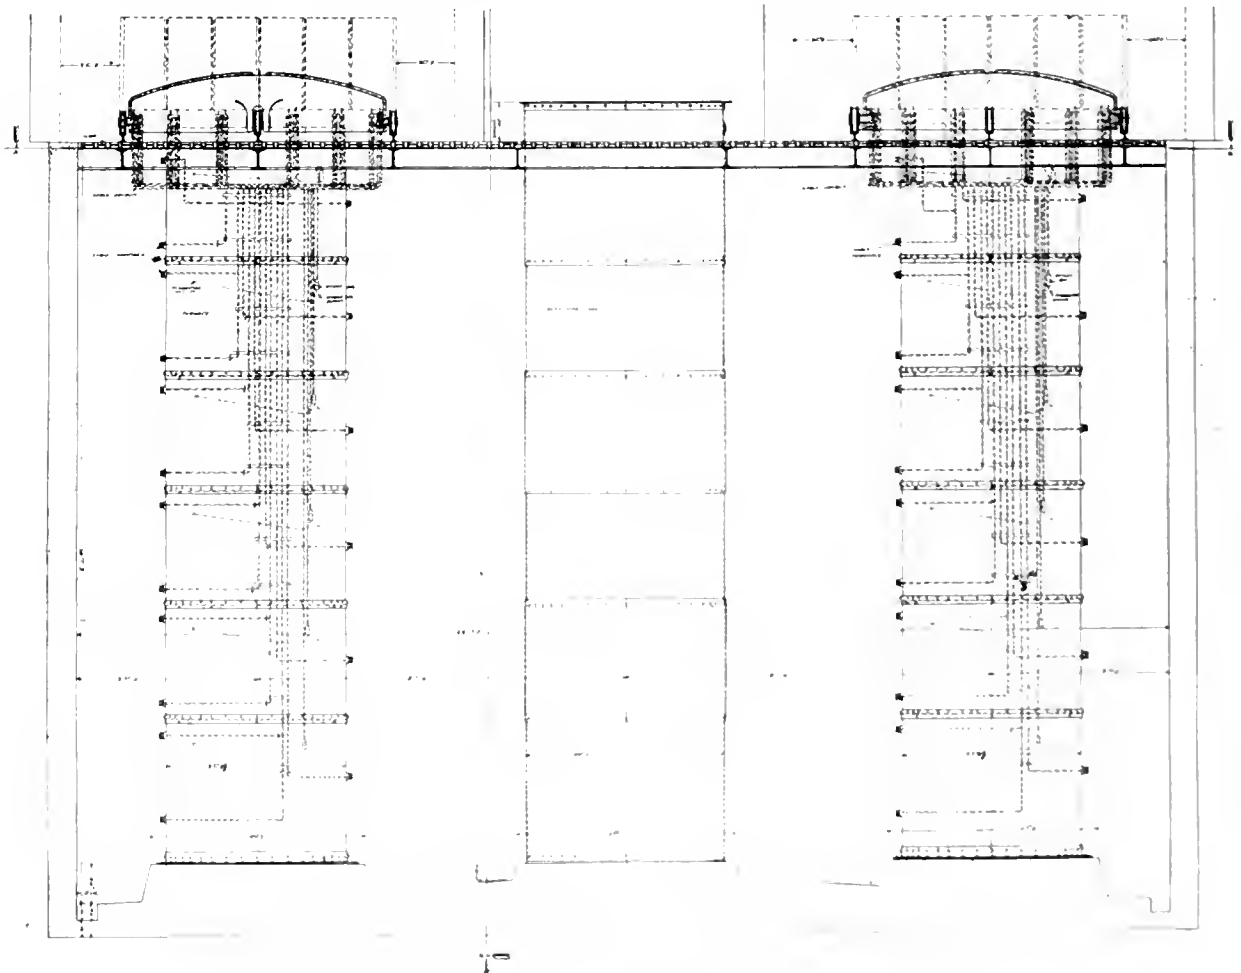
Sectional Elevation of Two Heat Treating Furnaces and Quenching Tank
